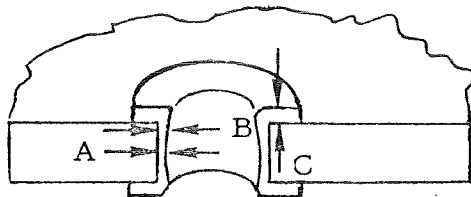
Desoldering of Multilayer Test Board Using a Hollow Heating Element Operating On a Continuous Vacuum
